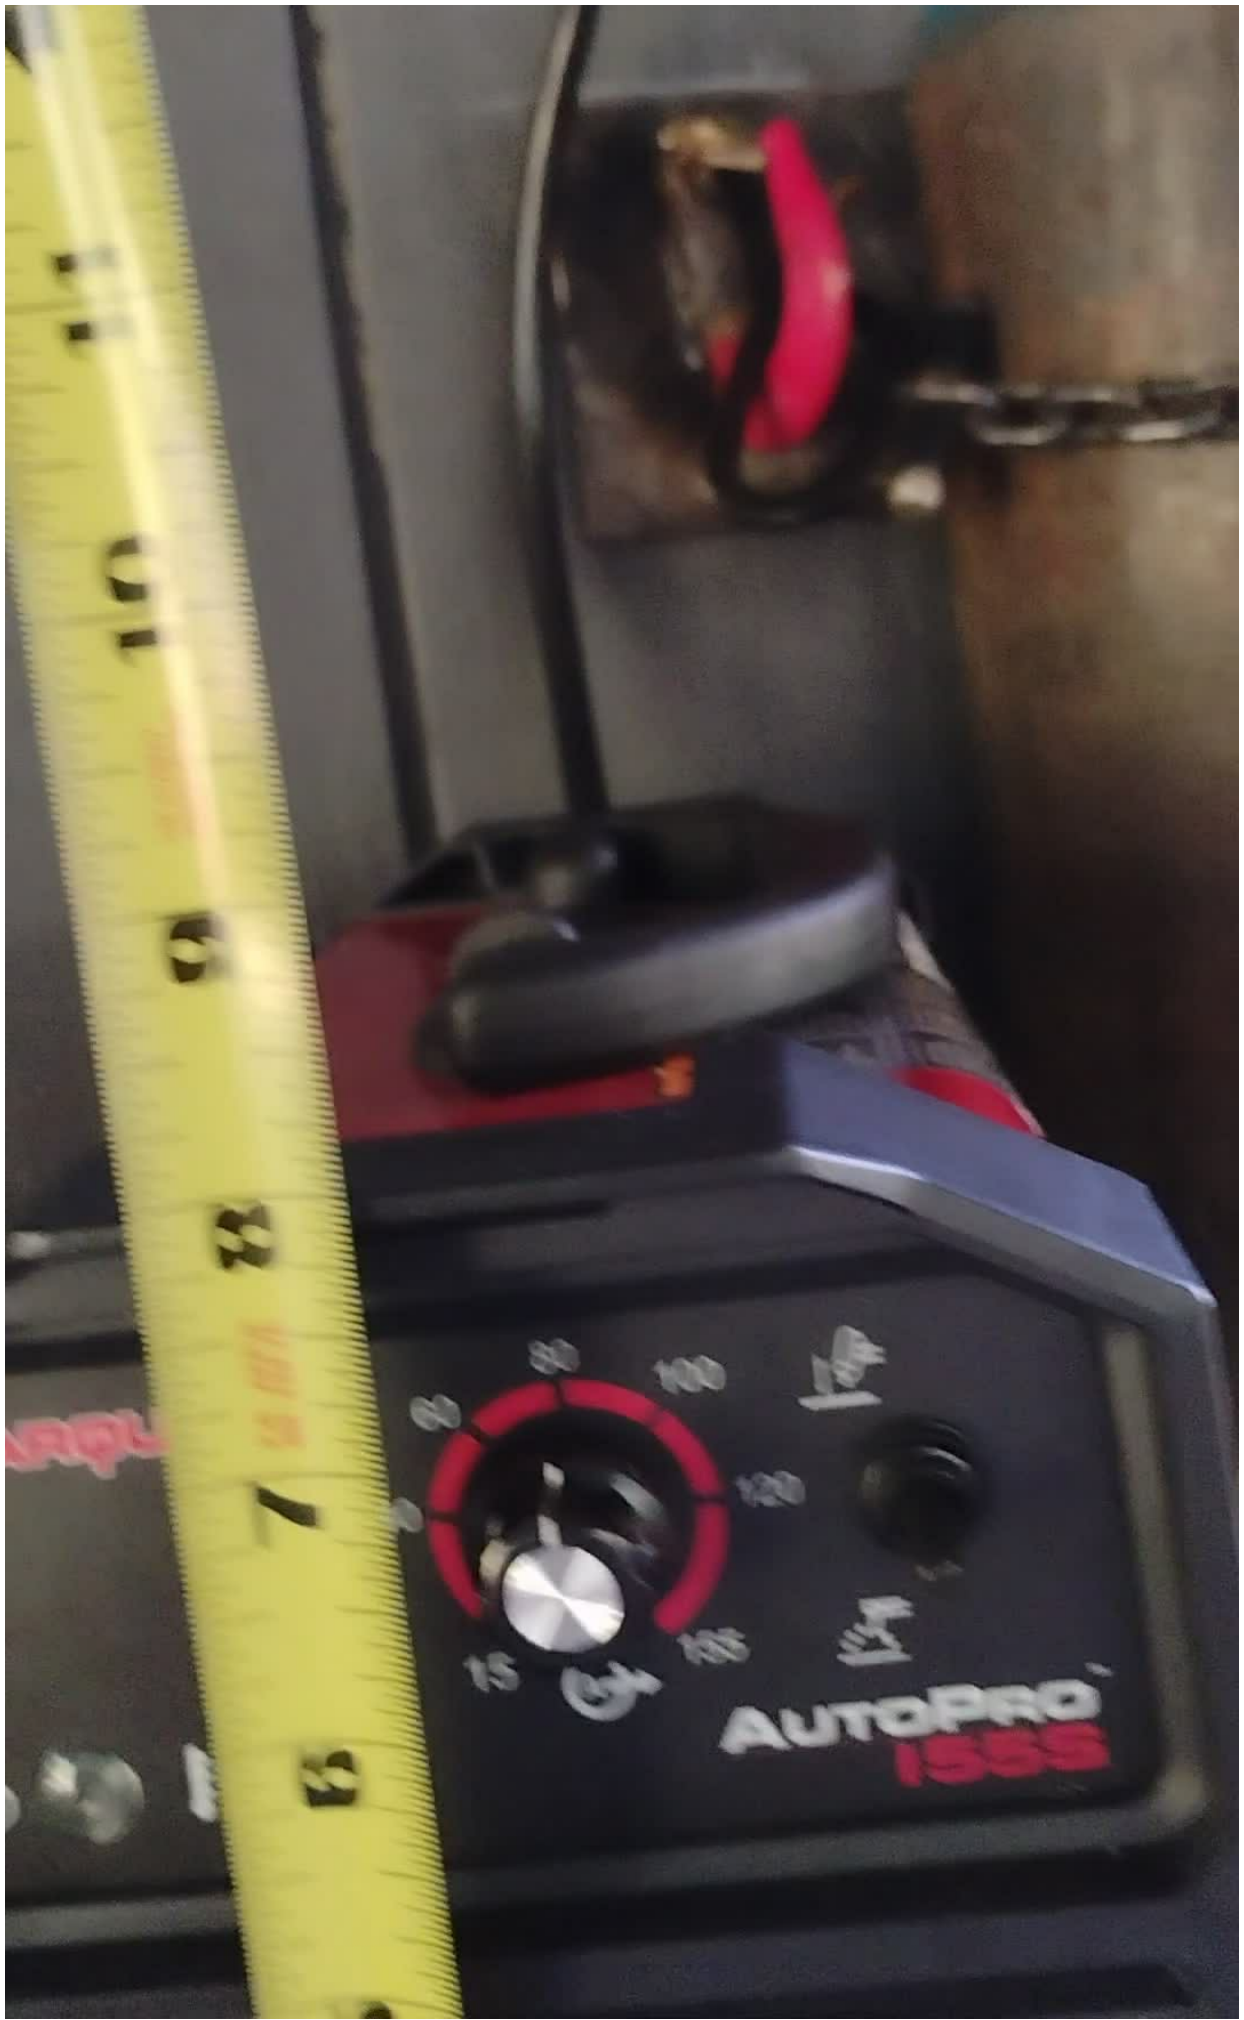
The Autopro 155S welder with a tape measure indicating its physical dimensions.
